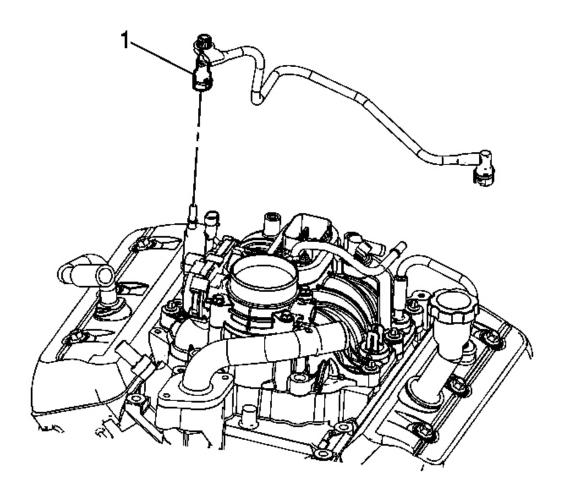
View Of EVAP Canister Purge Solenoid Valve Tube Quick Connect Fitting Courtesy of GENERAL MOTORS CORP.
